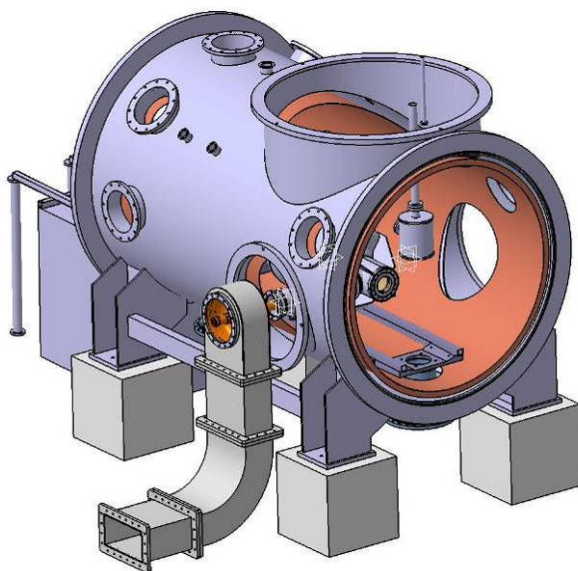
3D model of the cavity/coupler assembly in CRYHOLAB.
